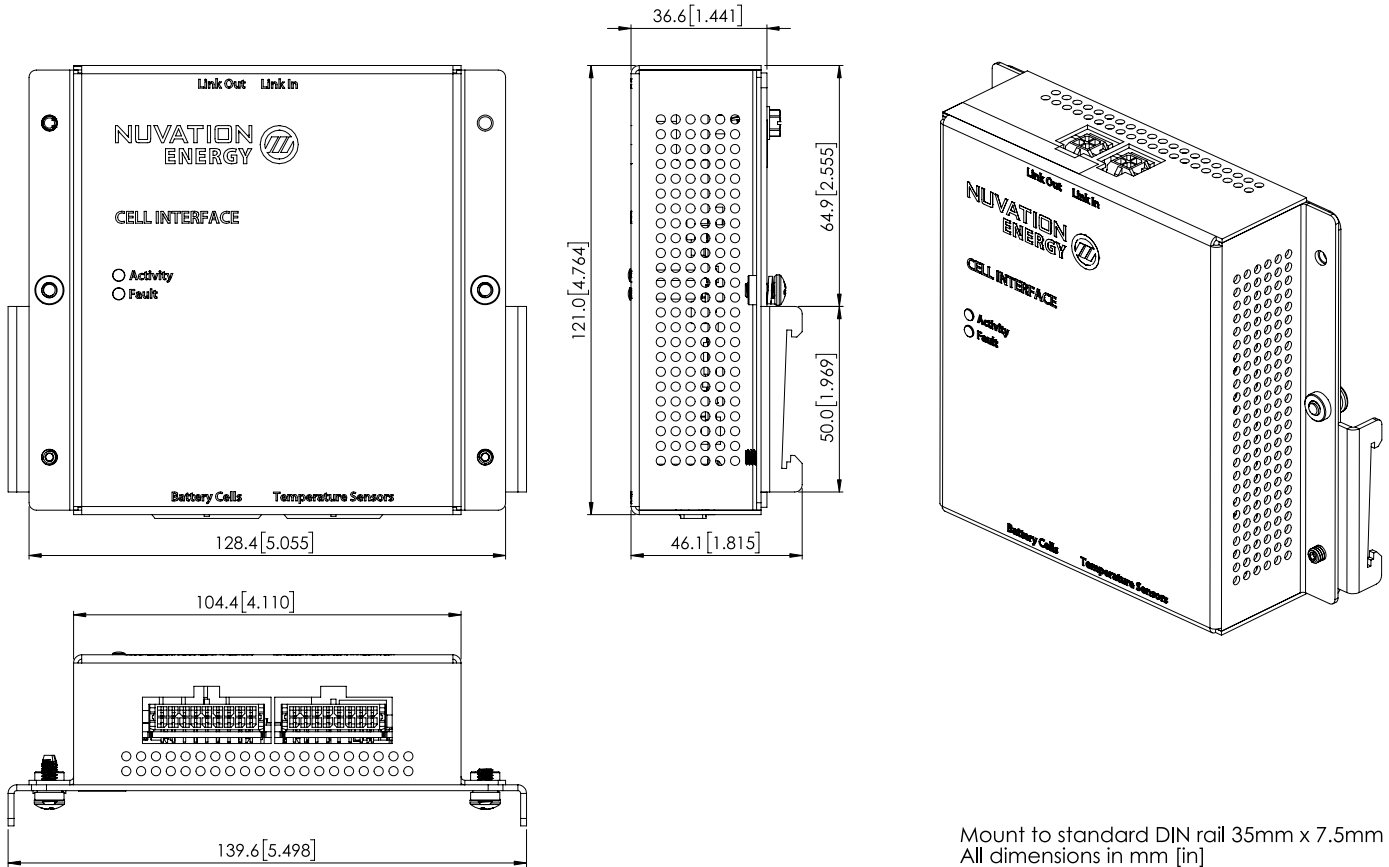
Mechanical Drawing of Cell Interface with Cell Interface Mounting Bracket (Bulkhead-to-DIN)
